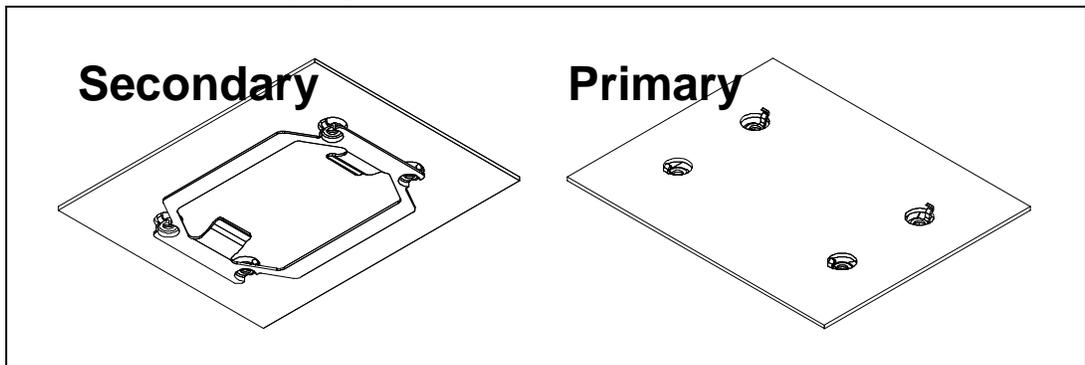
Isometric View of Hat Spring Attachment to the Base Board
